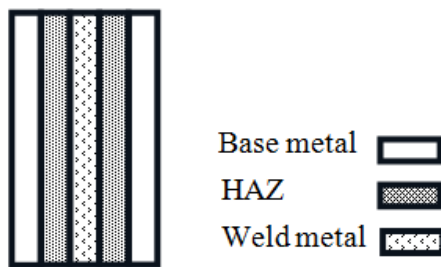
Schematic for corrosion test specimens which cover base metal, HAZ and Weld metal
